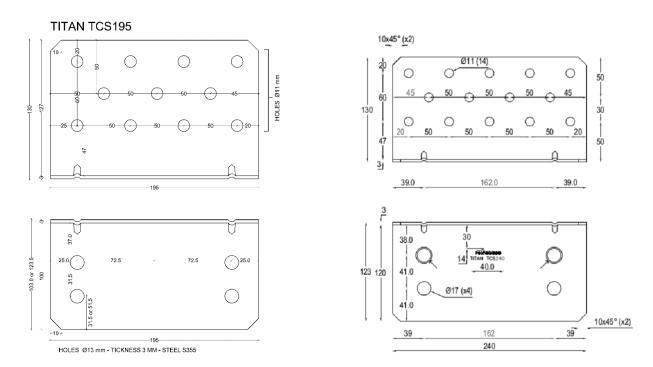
Dimensions of Angle Bracket TITAN TCS195
